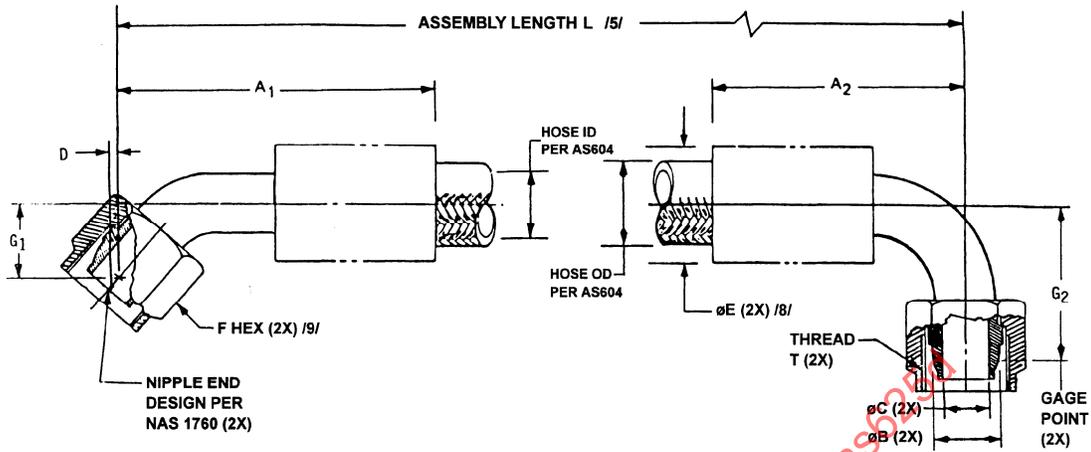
HOSE AND FITTING DIMENSIONS
